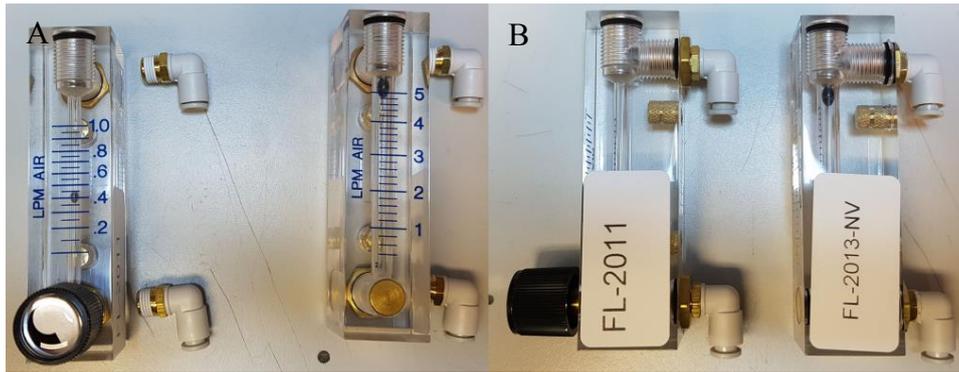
Assembly of the two acrylic flow meters: A) the source parts and B) the finished assemblies.
